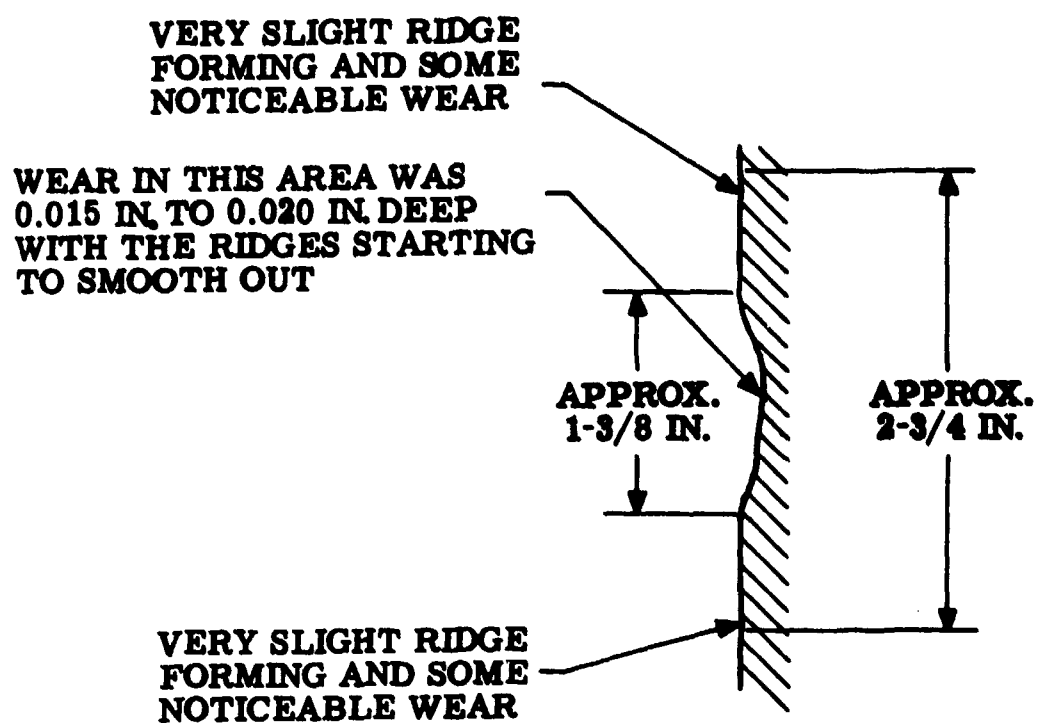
SURFACE PROFILE OF LOWER PLANETARY GEAR HOUSING AFTER 64 HOURS OF OPERATION WITH THE "RULON A" TAPE LINER.
